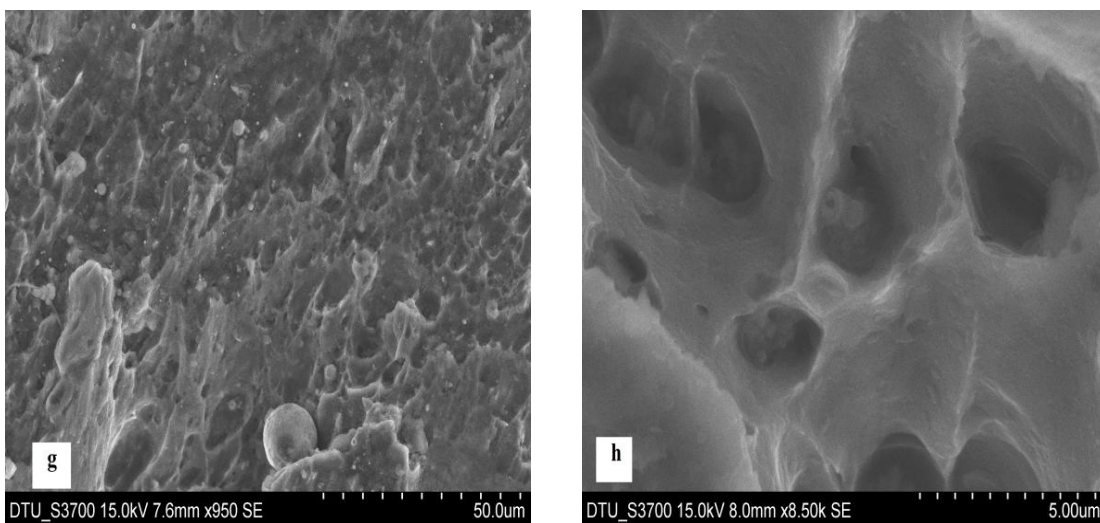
(g & h) FSPed three pass specimen tensile fractography (lower & higher magnification)
